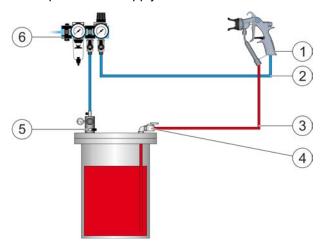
A manual spray gun with compressed air via the compressed air supply
